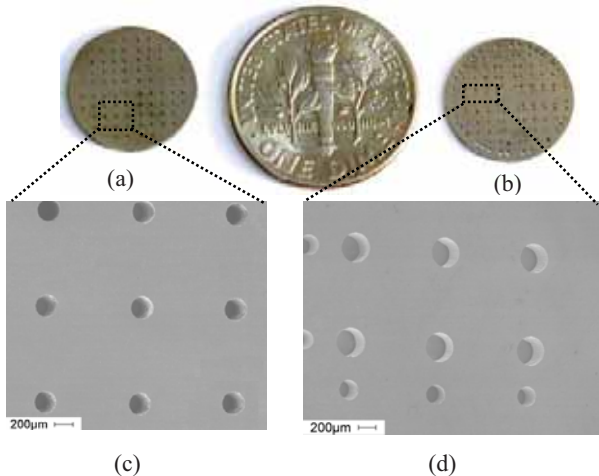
, Fabricated microvalve. (a) Inlet view (b) Outlet view. (c) Inlet channels (d) Outlet channels.
